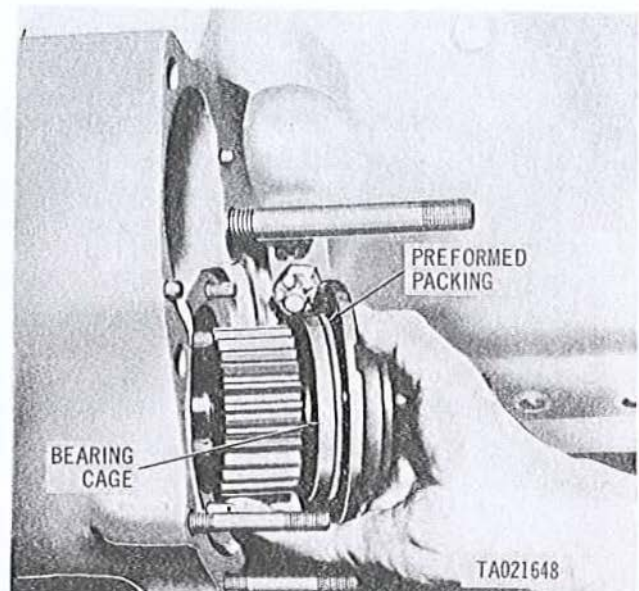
Removing or installing starter gearshaft bearing cage.
